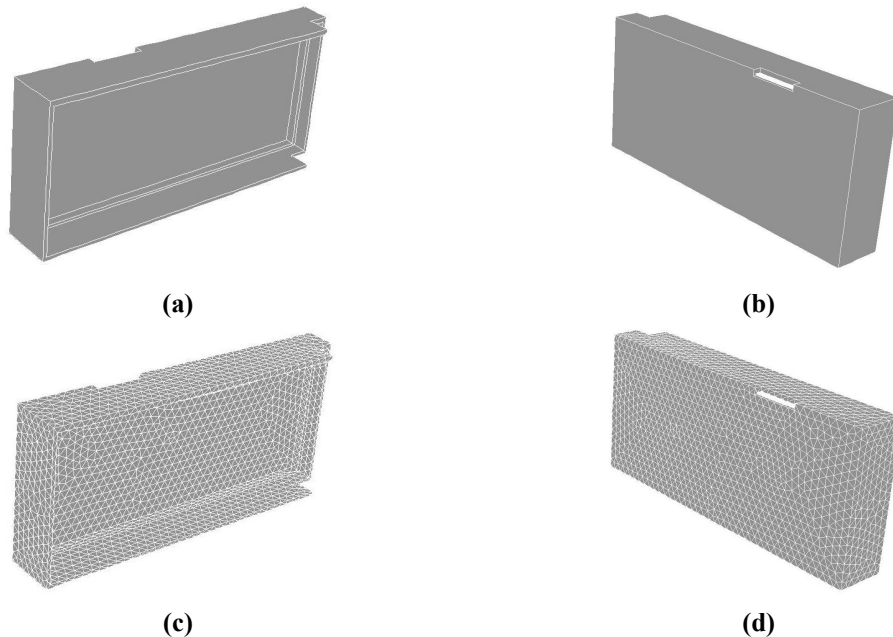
(a) Front and (b) back isometric views before meshing PCB panel, (c) front and (d) back isometric views after meshing PCB panel.
